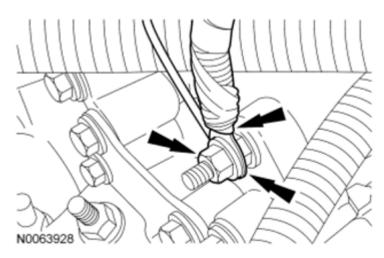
Locating Exhaust Flexible Pipe Clamp Courtesy of FORD MOTOR CO.
